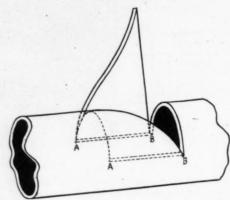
Method of cutting exhaust pipe to fit on cutout for muffler a reader uses
